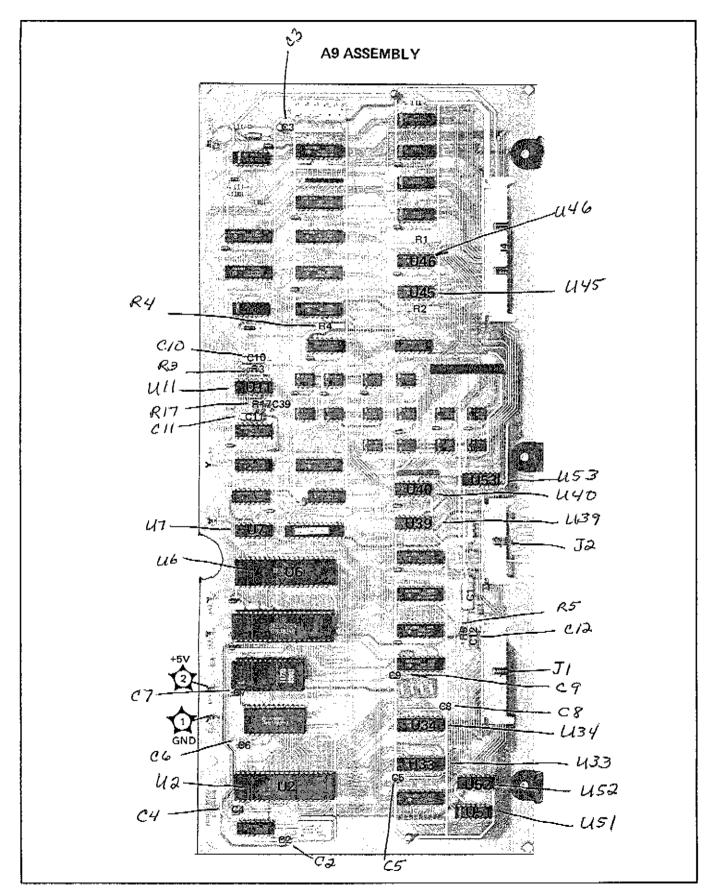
P/O Microprocessor Board Assembly Component Locations (P/O Change D)
